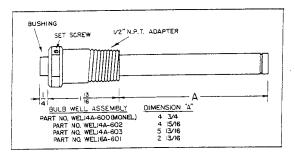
Bulb well for liquid immersion applications where a temperature bulb may be removed without draining tank.
